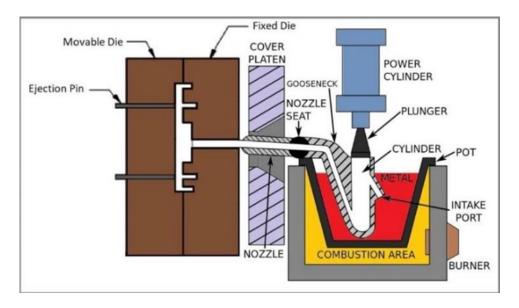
Hot chamber die casting machine components. (http23)
